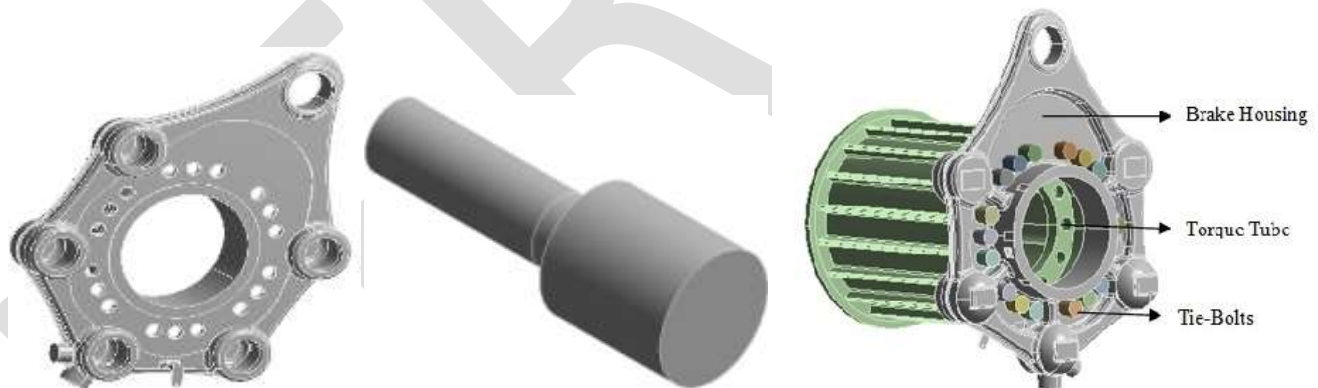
CAD models of Brake housing, Tie-Bolt & Assembly.
